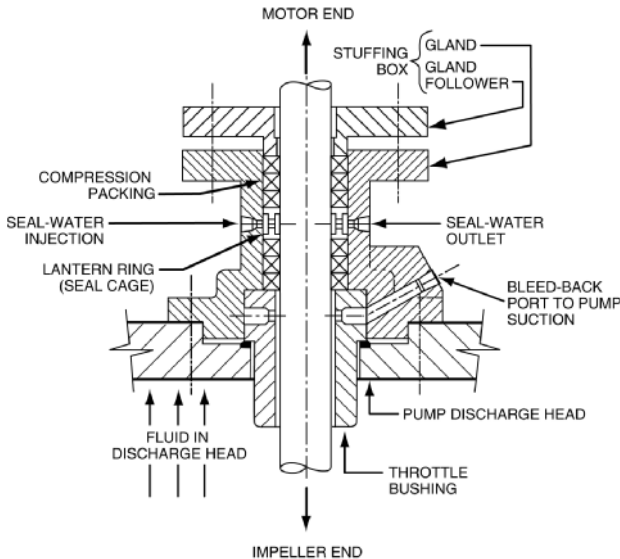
Compression packing with throttle bushing for pressure breakdown
